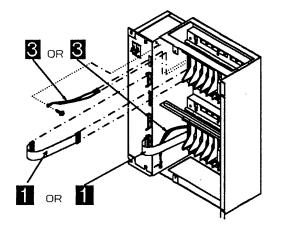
LIC Board Type 1 Enclosure Assembly
